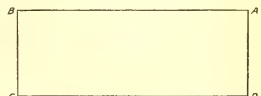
METHOD FOR WELDING A SQUARE SHEET OR PATCH
